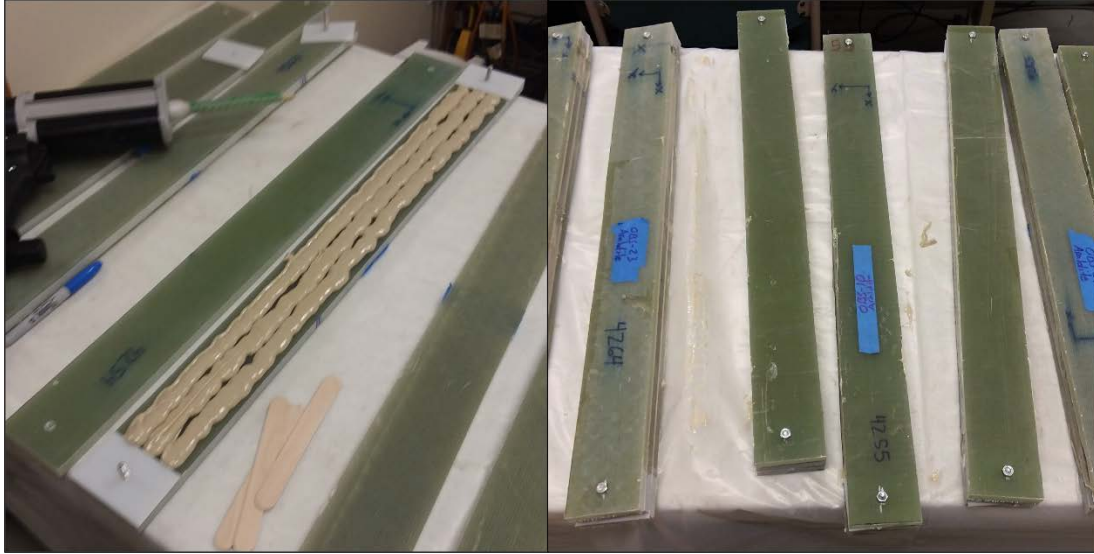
OBS composite blanks being (left) adhesively bonded and (right) bolted together while curing
